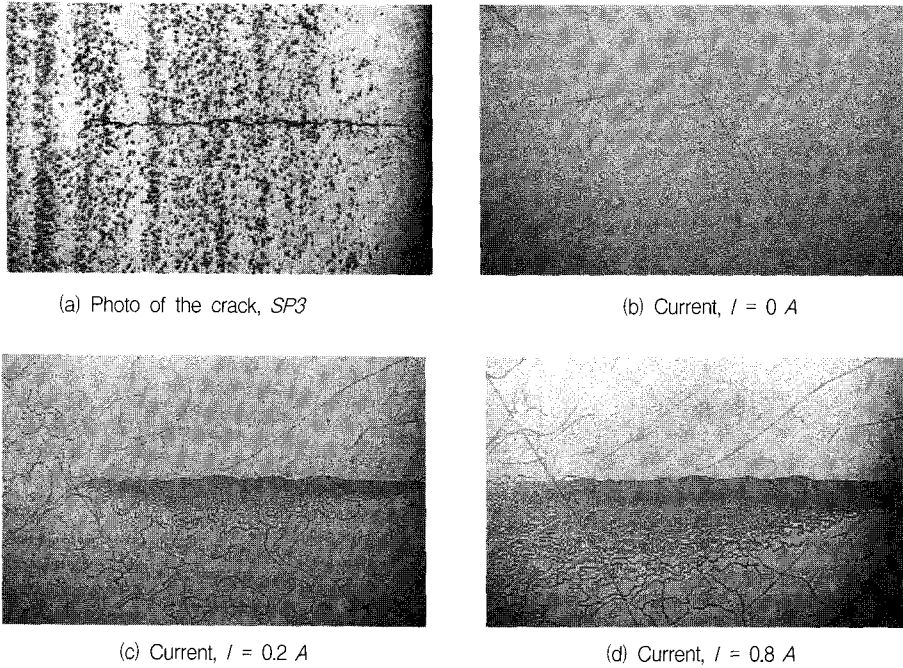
Photographs of the crack by magneto-optical inspection method, SP3
